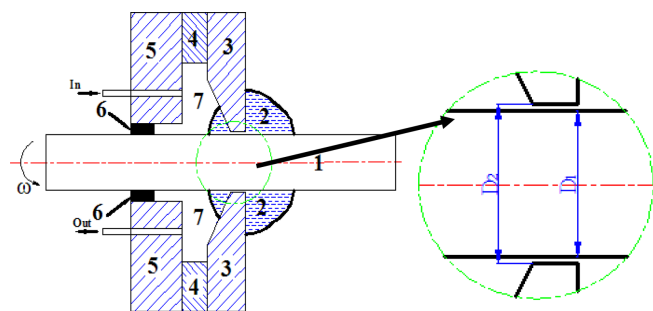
(Color online) Model of rotating shaft-type magnetic fluid seal.
